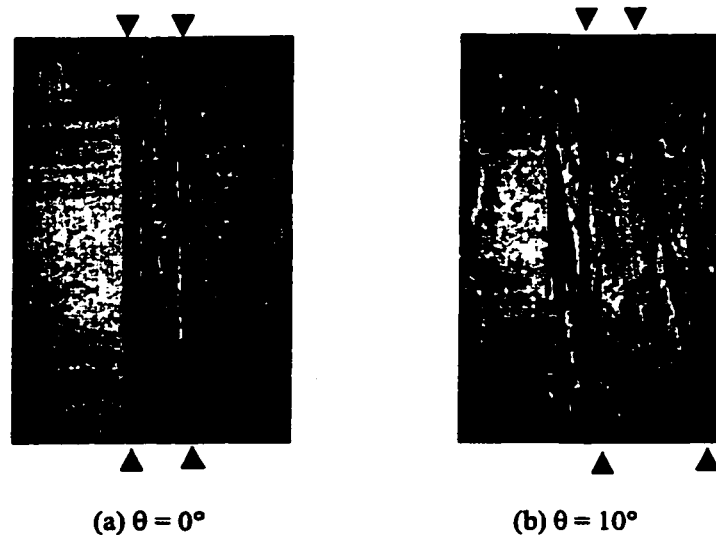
Fracture surface morphologies of $\text{II}(\theta)$ specimens; the failure mode of interface crack.
